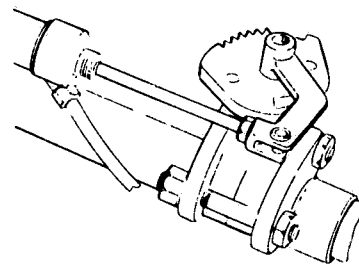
CHECK ACTUATORS FOR BUTTERFLY VALVES.
